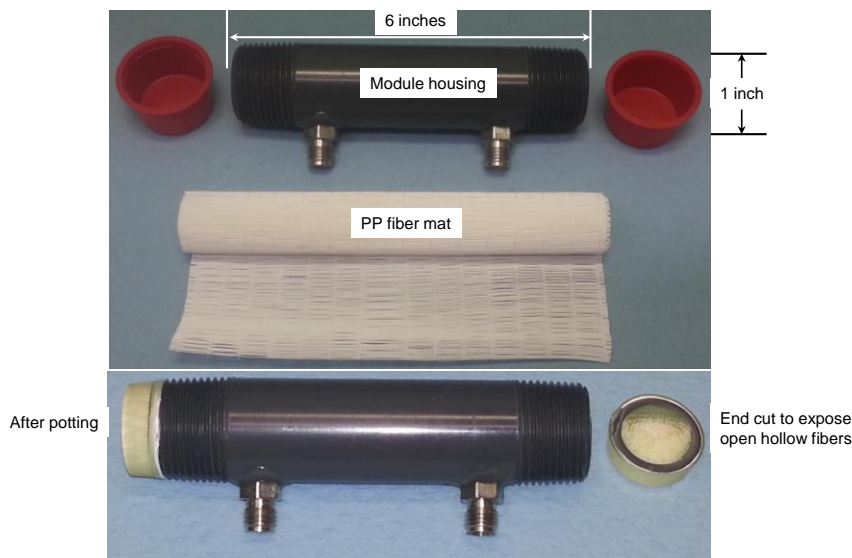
Photographs of the fabrication process of the 1-in module; top photograph: PVC housing and fiber matt before potting; bottom photograph: module after potting – left side before fiber ends have been cut off - right side after cutting the end off.
